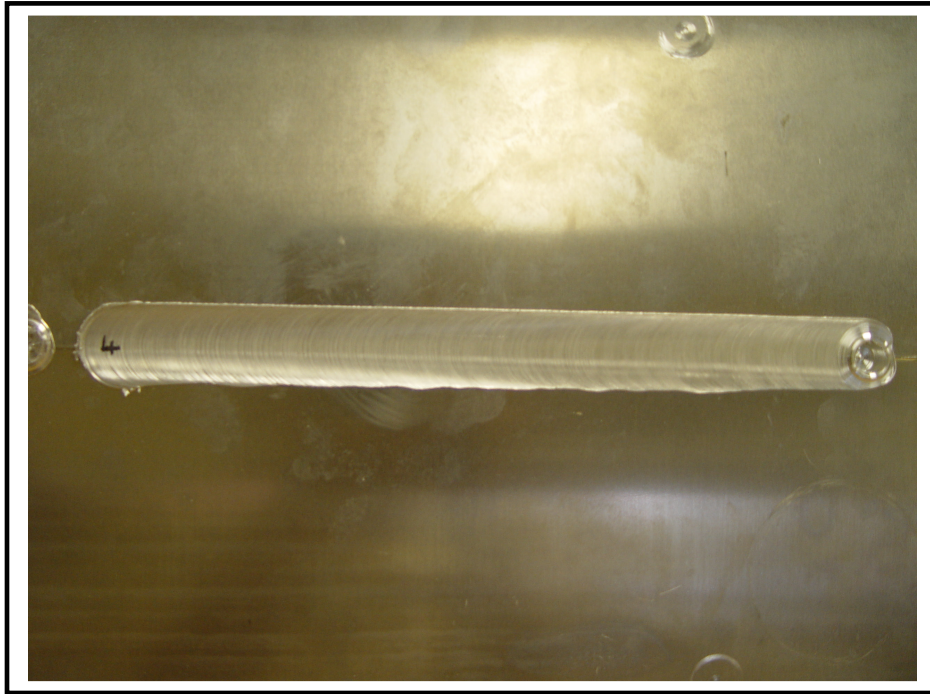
FSW-weld (2024 alloy and Tool 2).
